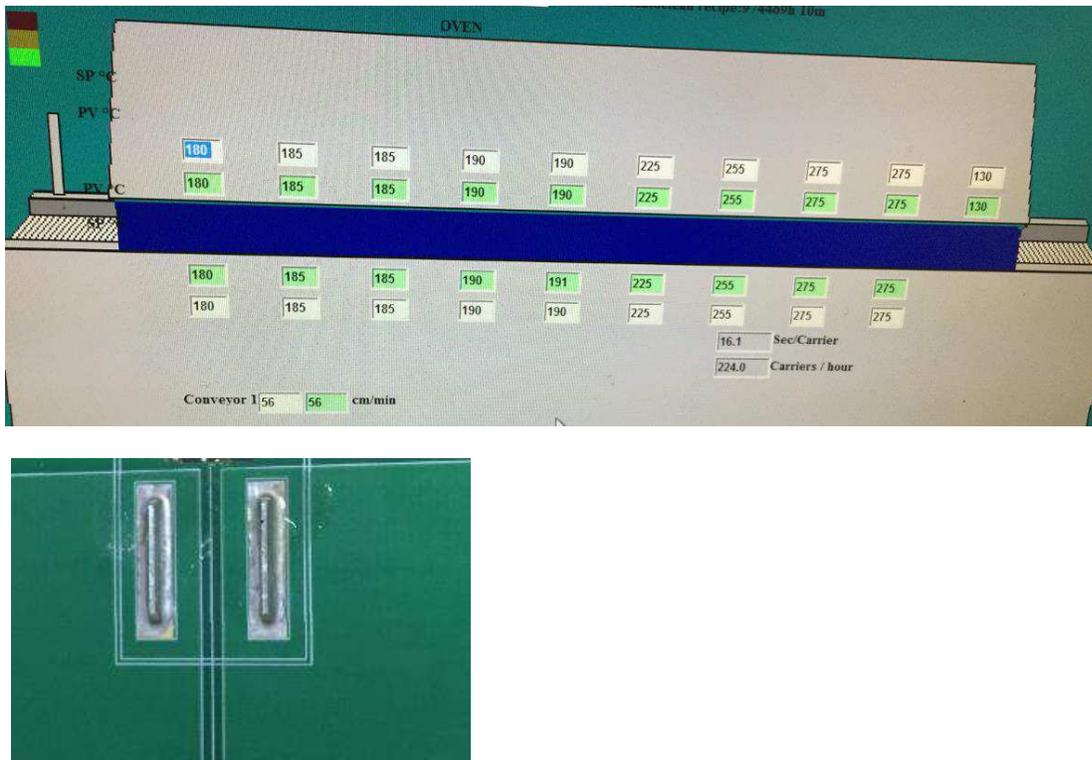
PIP Reflow soldering setup and soldering result Reference View.
